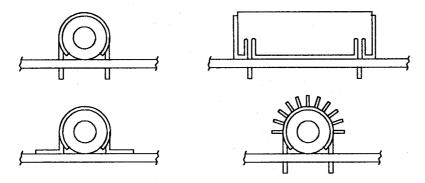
Several cores adapted for printed circuit board use. One has mounting feet instead of pins; another has cooling fins.
